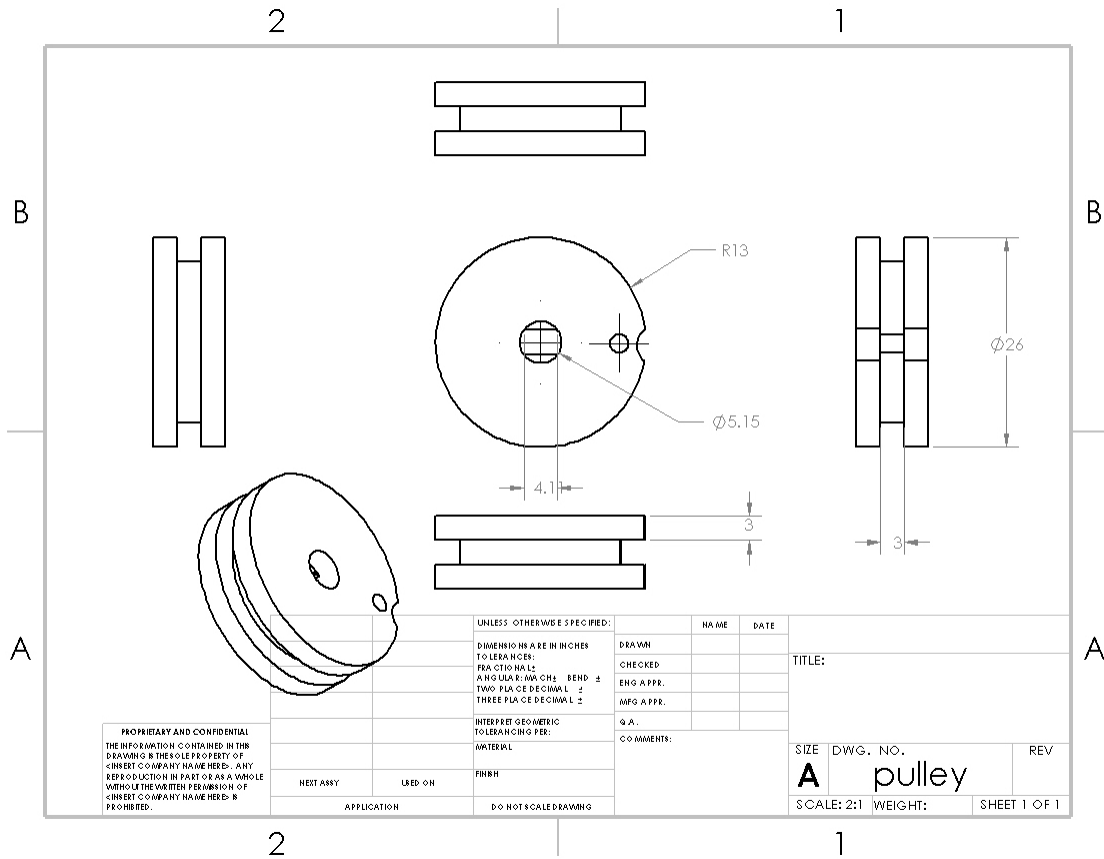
A SolidWorks drawing of the pulley used to actuate the strings.
